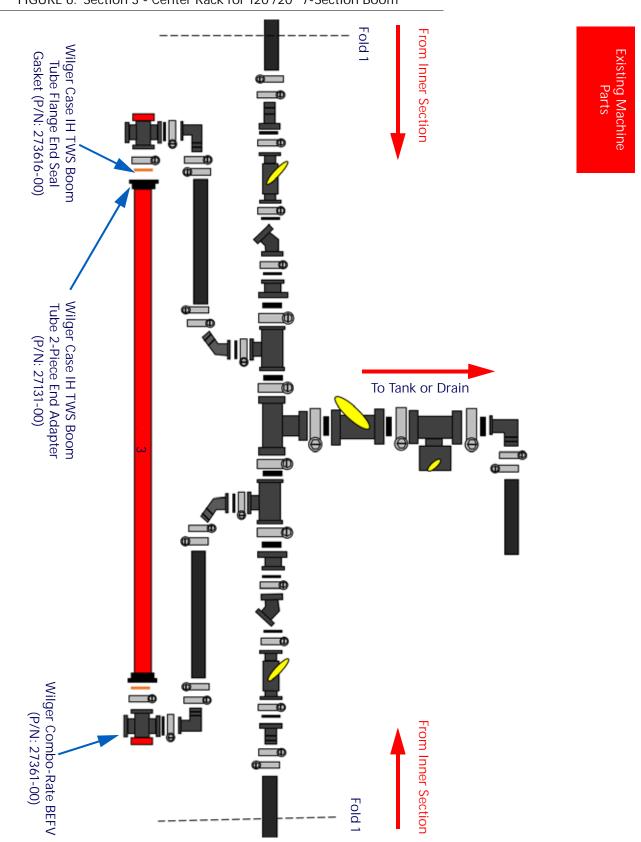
Plumbing Example for Center Boom Section for 5-Section and 7-Section Booms
